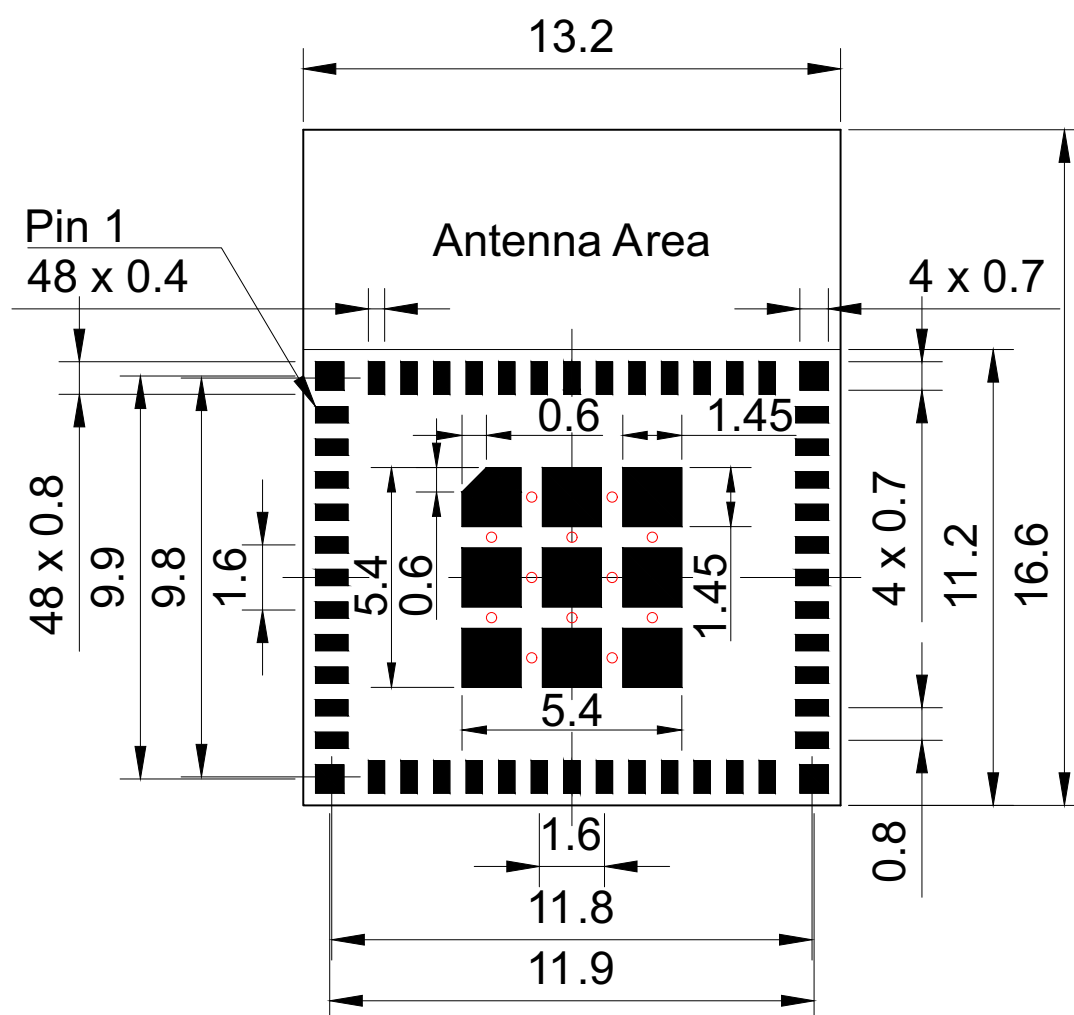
Shelly MOD1 Recommended PCB Land Pattern
